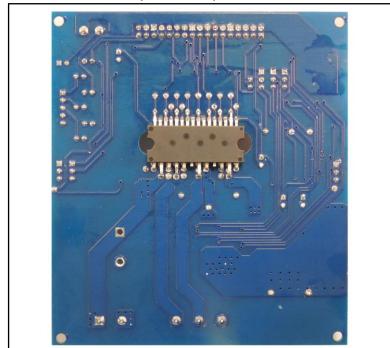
Motor control board (bottom view) based on SLLIMM-nano™ 2nd series
